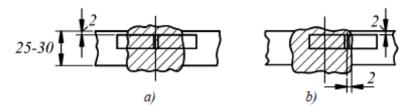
Sketch for cutting-out and notch location for impact test specimens from the butt weld test assembly during test to approve electroslag and electrogas welding: a - with the notch located in the centre of the weld (KV_{CL}); b - with the notch located in the weld at 2 mm from the fusion line (KV_{+2FL})
